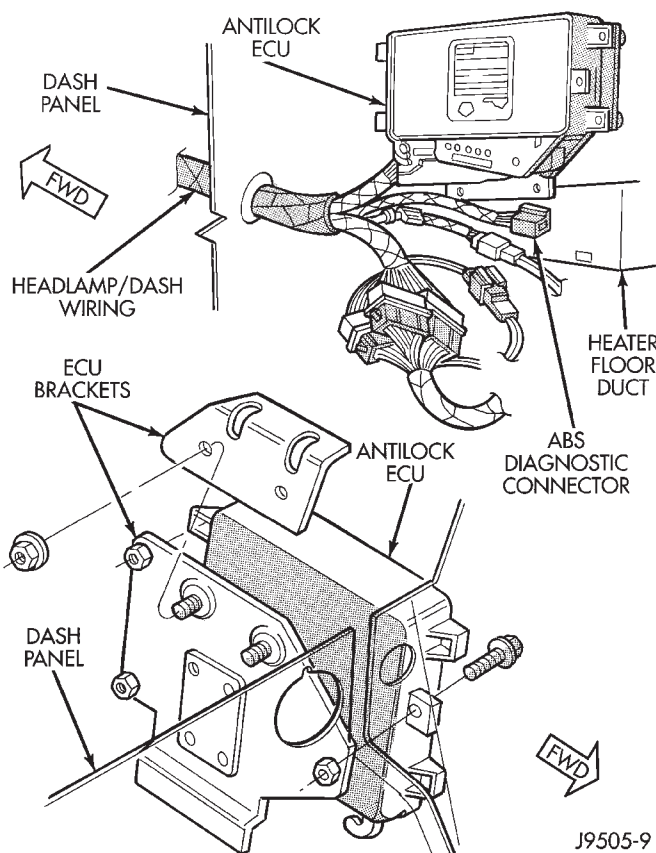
Antilock ECU Mounting (Right Hand Drive XJ)
